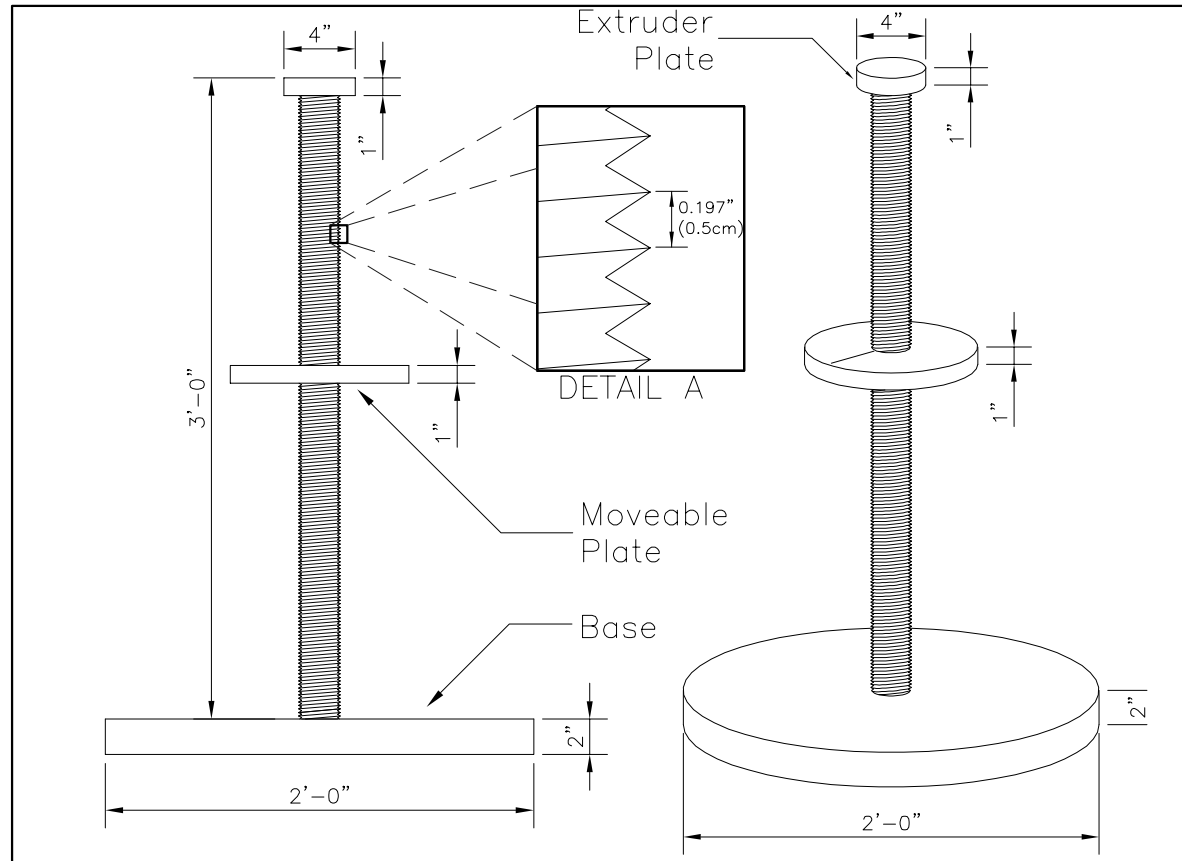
Typical construction diagram for the soil core extruder (redrawn from Phillips 2002). The 4-inch extruder plate fits tightly inside the core tube. A moveable plate (diameter typically ~6-8") moves up or down the lead screw with a precise pitch of 0.197" (0.5 cm) per 1 revolution. The extruder is constructed of PVC and custom machined.
